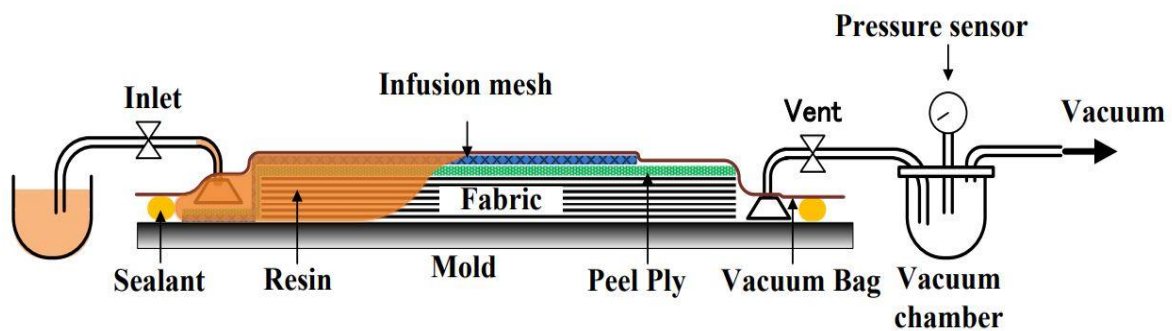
Vacuum-assisted resin transfer molding (VARTM) [12]
